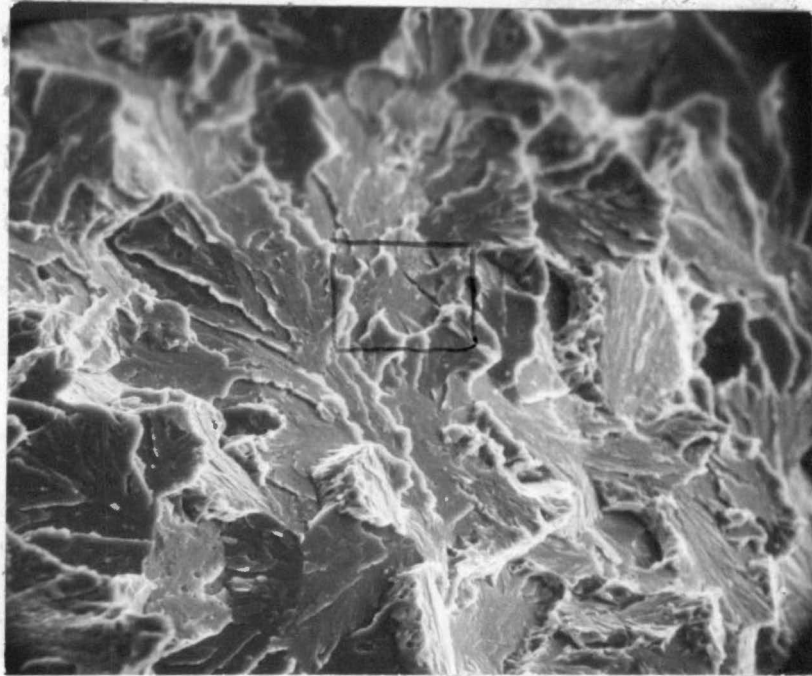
SEM Fractograph of 1.00 in Specimen. Area Shows "Flat" Surface of Brittle Fracture. Mag.: 1600X.
